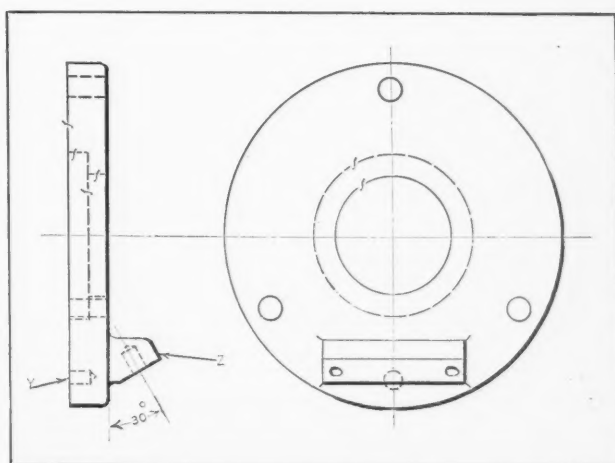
Casting Drilled on Indexing Fixture Shown in Fig. 2
